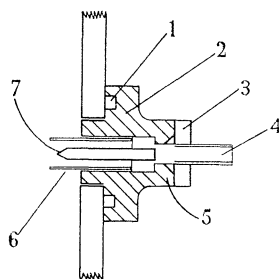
Electrode assembly. 1, O-ring; 2, main body; 3, compression plate; 4, electrode body; 5, O-ring; 6, quartz sleeve; 7, tungsten rod.
